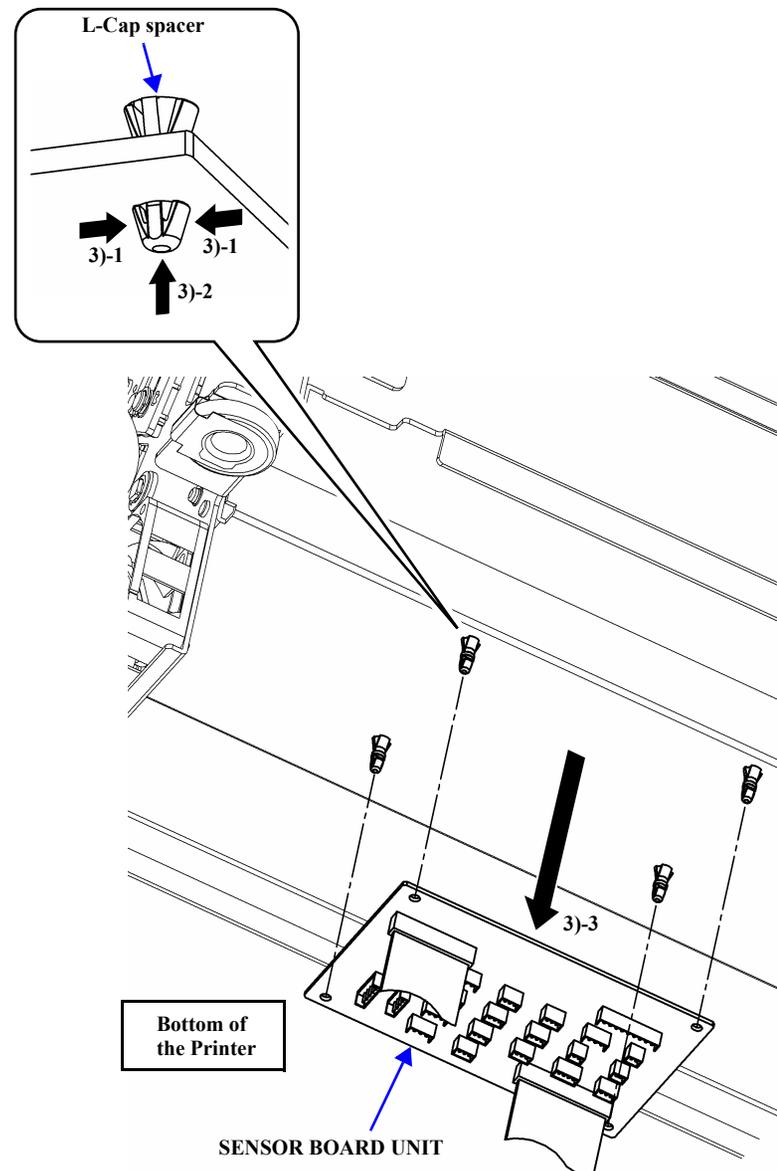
SENSOR BOARD UNIT Removal (2)
